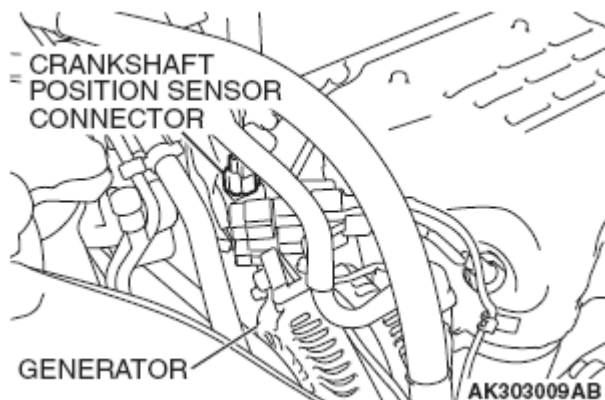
Identifying Crankshaft Position Sensor Connector And Generator
